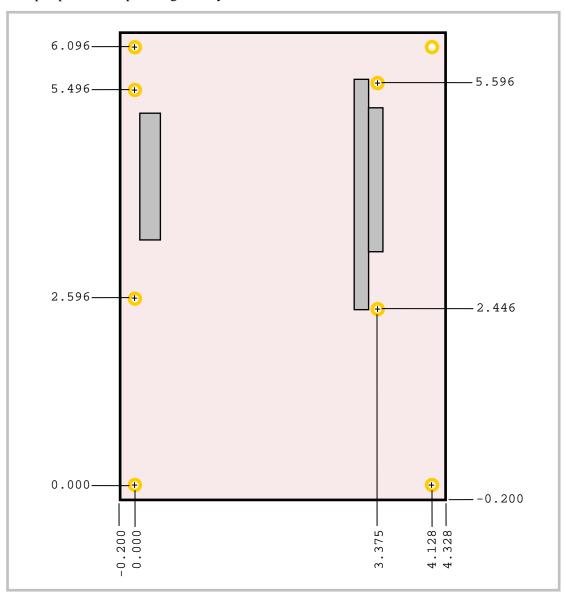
VL-EPIC-17 Dimensions and Mounting Holes
